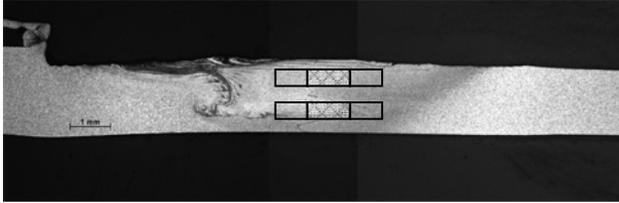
An illustration of miniature tensile specimen locations superimposed in the weld region.
